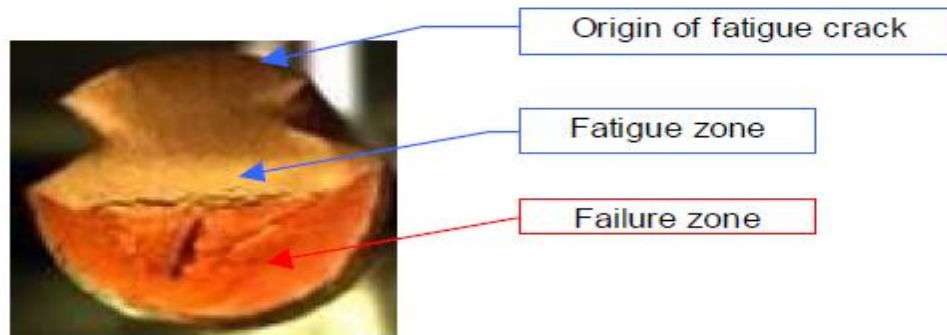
Fatigue fracture obtained on the RTRI's bench [9].
